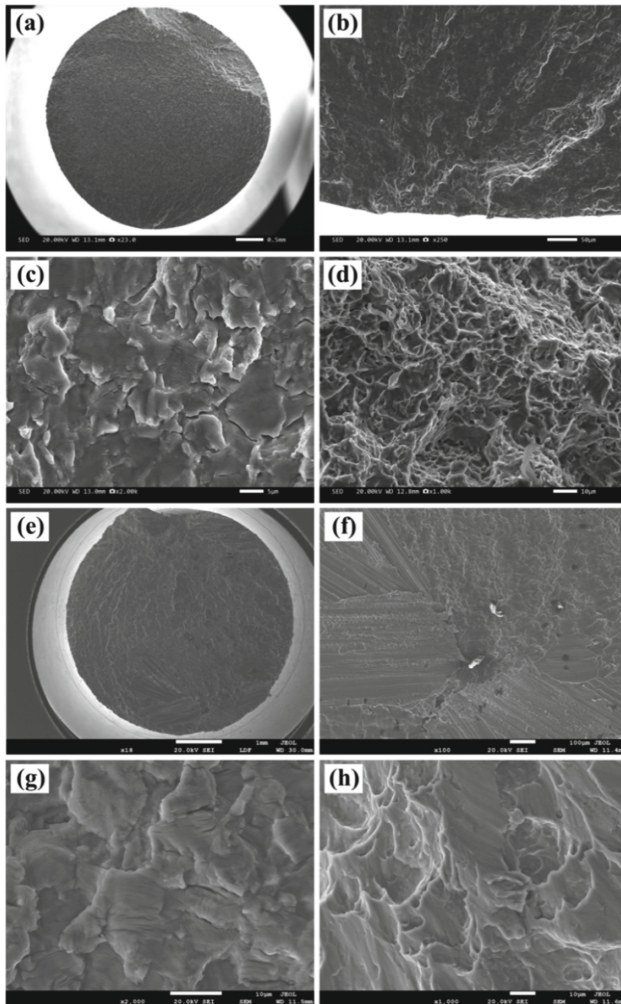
Fatigue fracture morphology of TC4 alloy smooth specimens at room temperature ($\sigma = 580$ MPa, $N_f = 2.96 \times 10^6$): a macroscopic micrograph, b fatigue crack initial stage, c region of stable crack growth, d fast fracture zone; and 400 °C ($\sigma = 500$ MPa, $N_f = 2.57 \times 10^7$): e macroscopic micrograph, f fatigue crack initial stage, g region of stable crack growth, h fast fracture zone.
